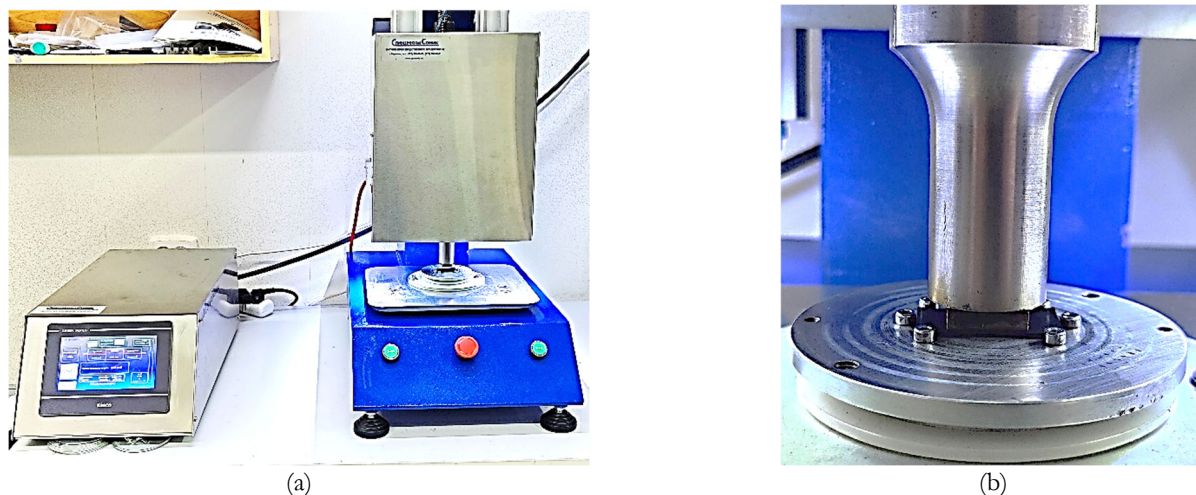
Ultrasonic welding bench (a), welding setup on anvil (b).
